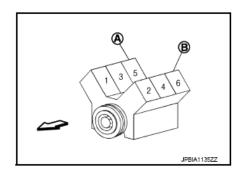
Identifying Bank Names (1 And 2) Courtesy of NISSAN MOTOR CO., U.S.A.
